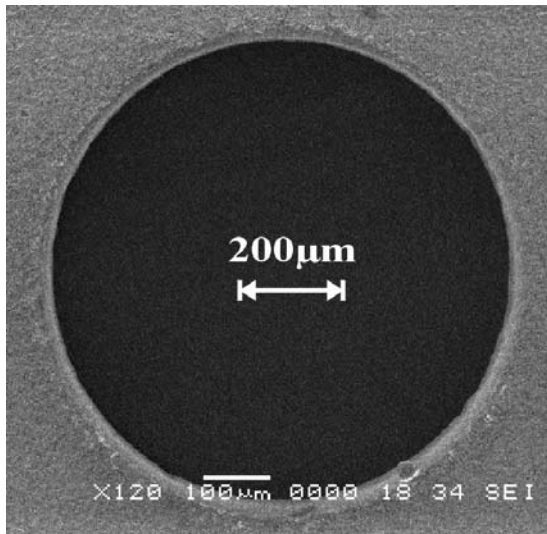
1 mm hole drilled in a 200 μm thick ceramic sheet with a STACCATO laser
